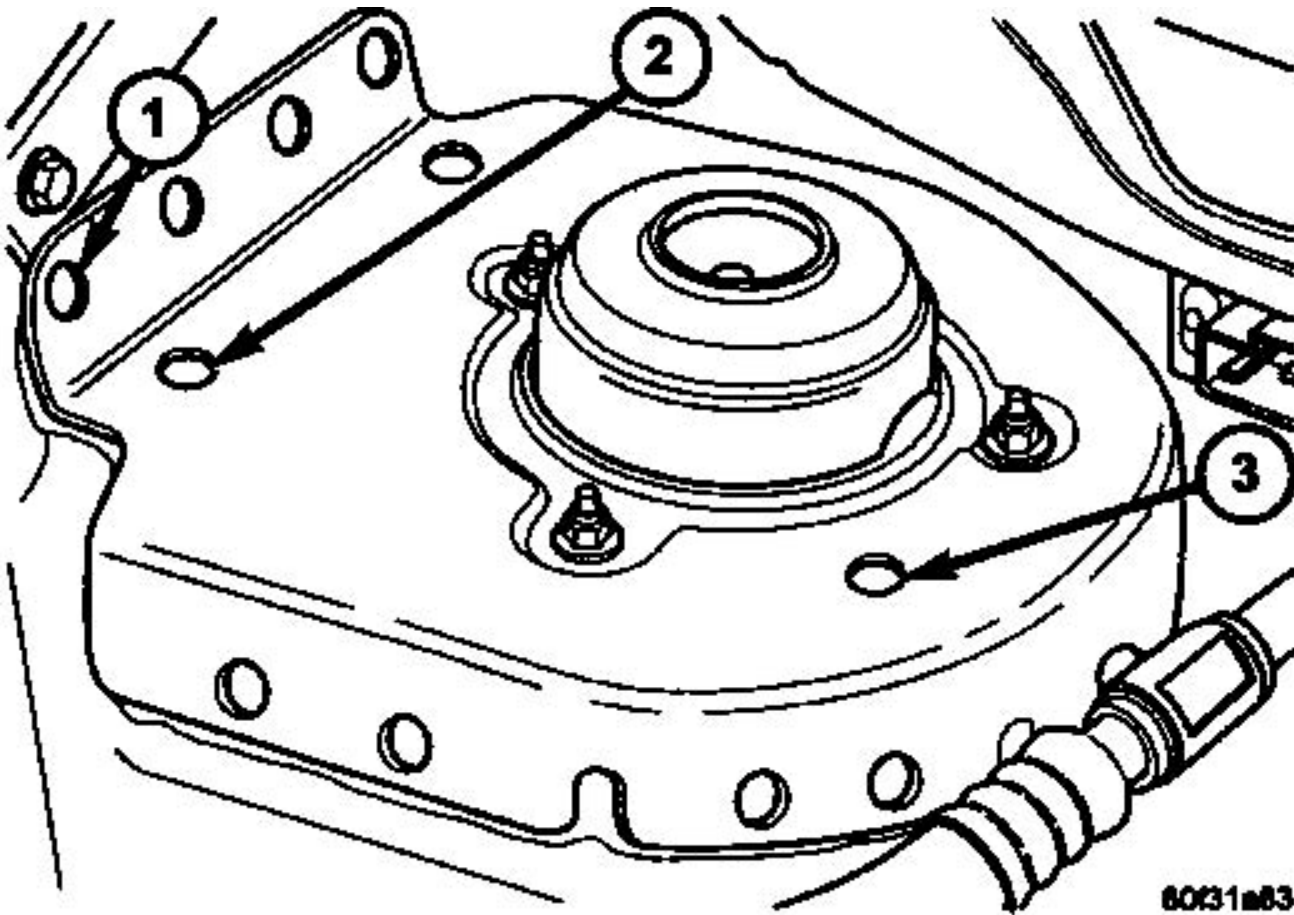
Cap with the 3 holes to be drilled for self-tapping screws and the 7 holes for rivets
